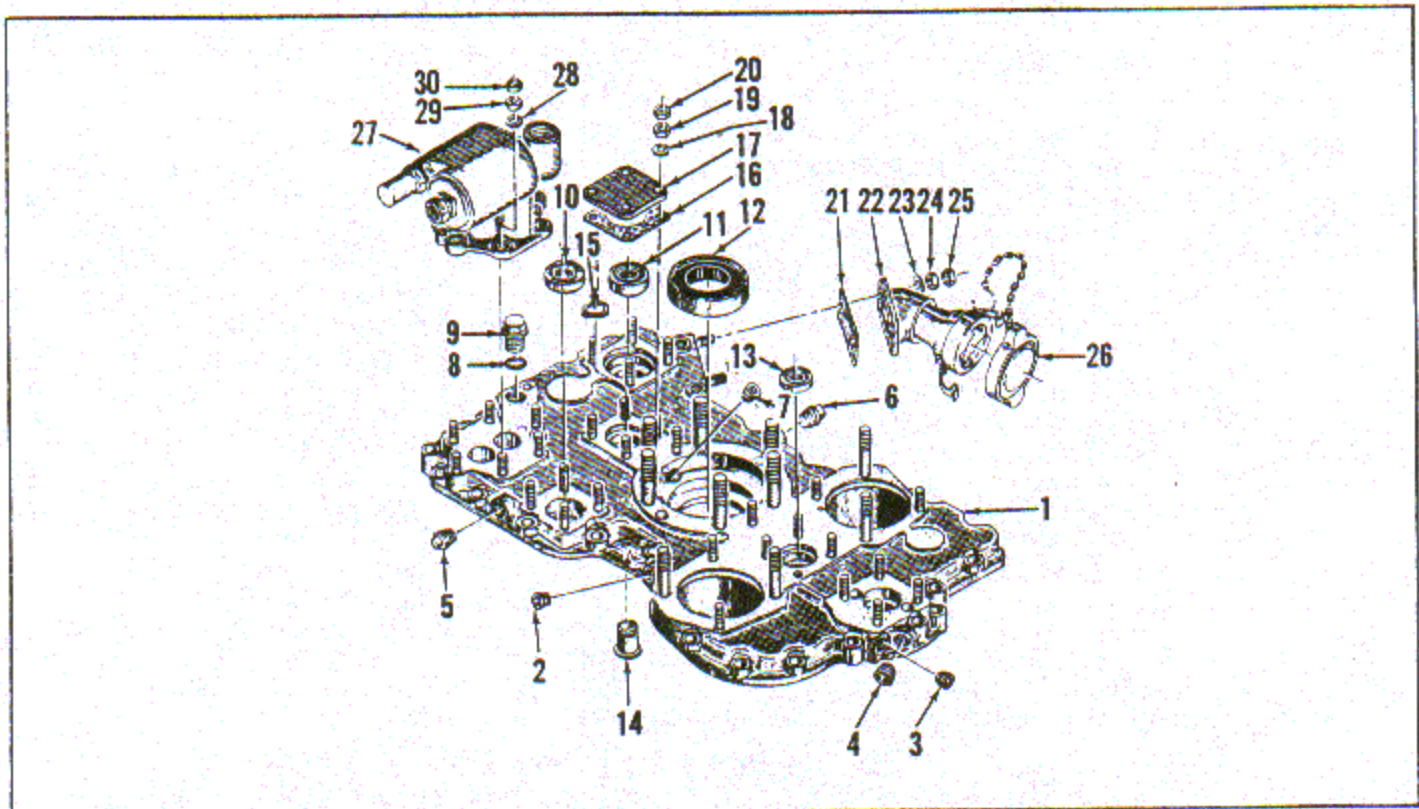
Accessory Case Rear Half Subassembly Procedure (Sheet 1 of 2)
